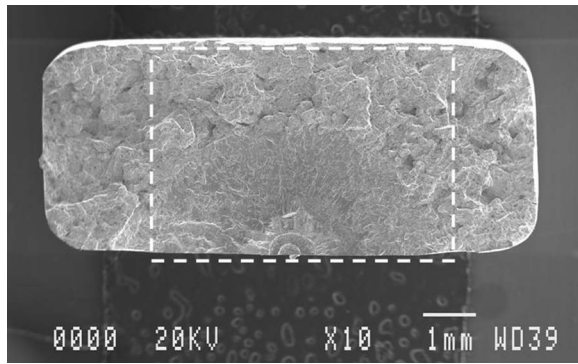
GXMM247 fatigue crack growth fracture surface for  $K_b$  specimen 13K at 649°C. Dotted area is enlarged in Fig. 17.
